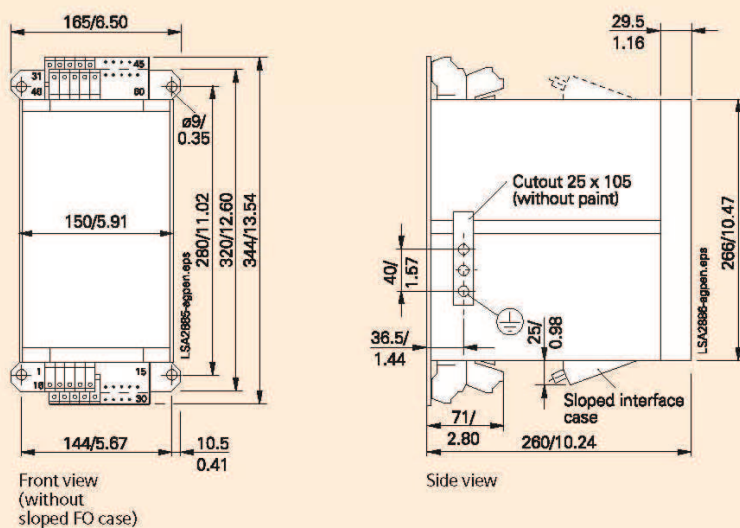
7VE61 mounted in 1/3 surface-mounting housing 7XP20 for panel surface mounting
